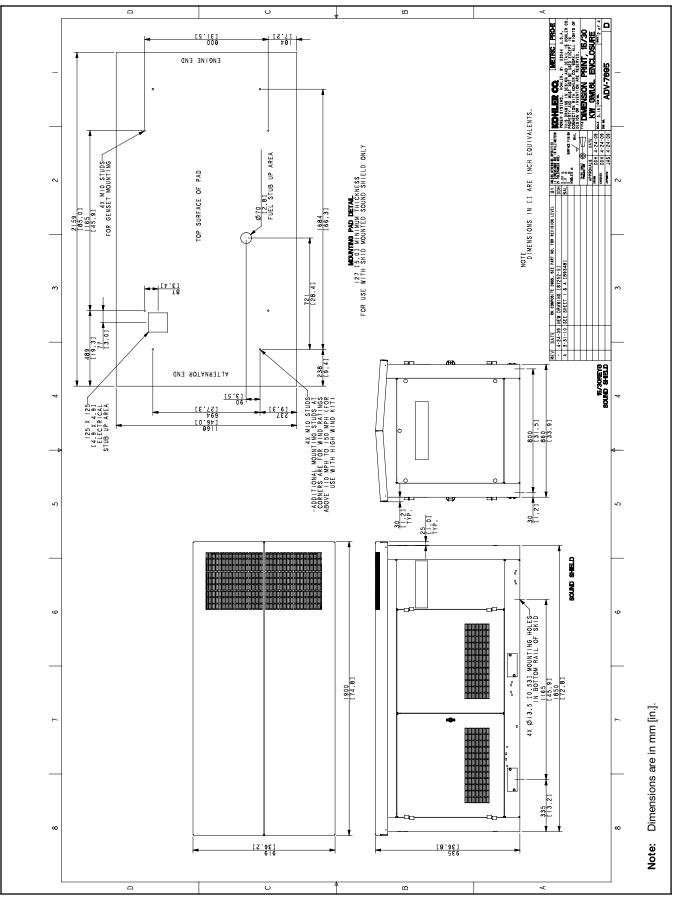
Dimension Drawing, ADV-7695, Sheet 2, Sound Enclosure
